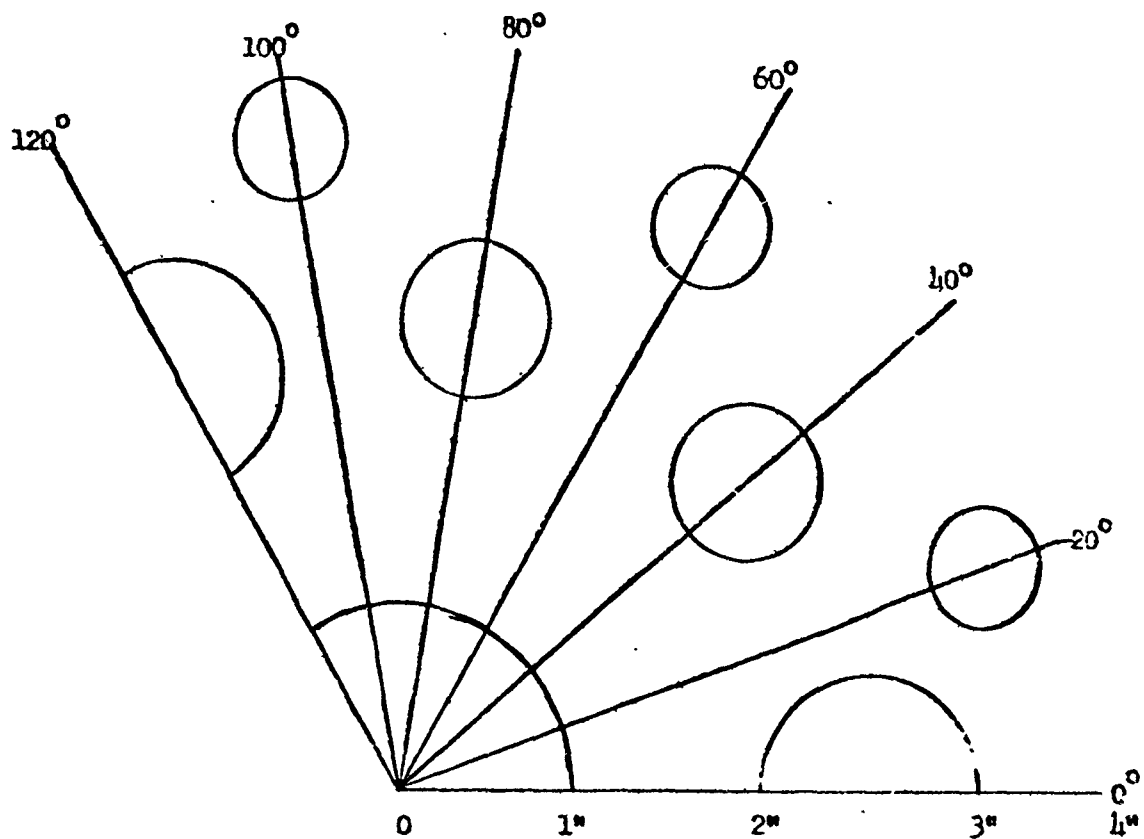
End View of a 120° Sector of the 19 Tube Nozzle
